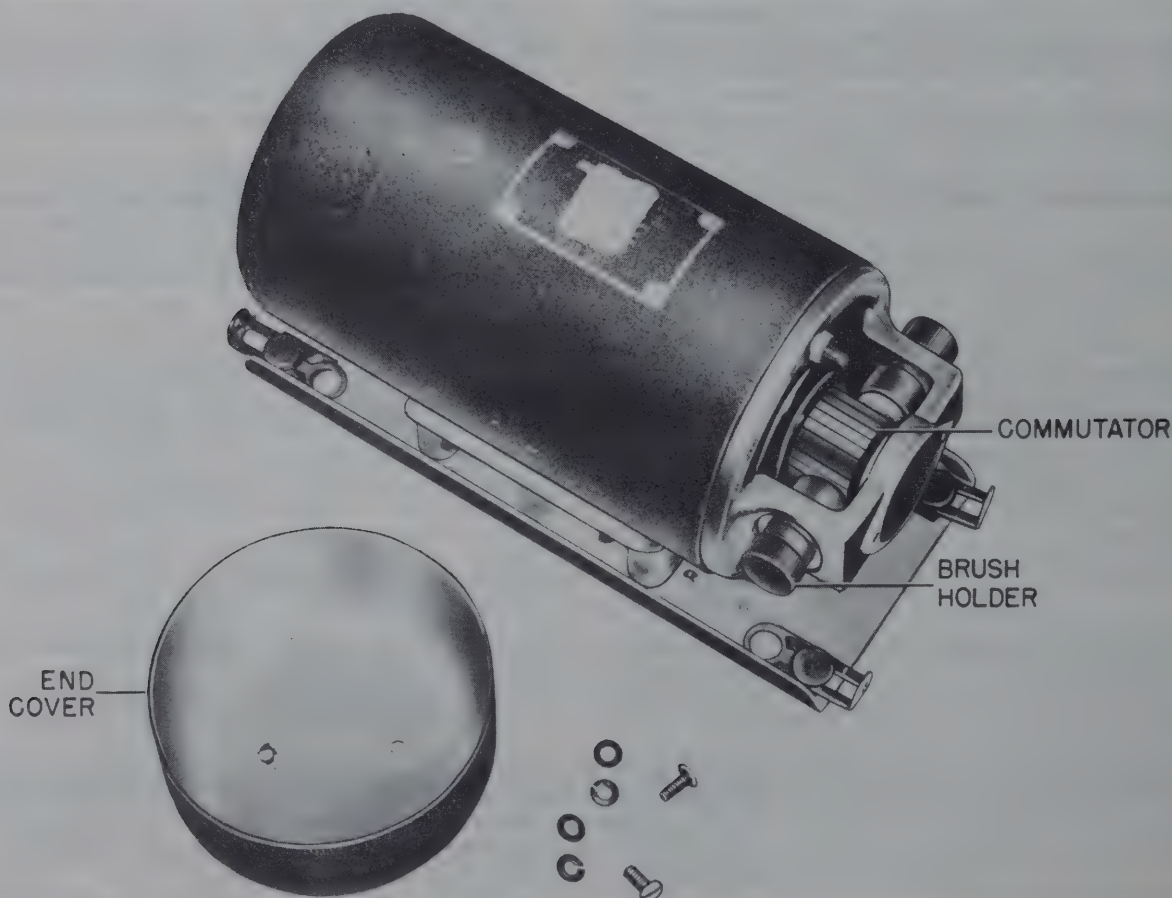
Dynamotor Unit DY-21/ARC-3 With Cover Removed
